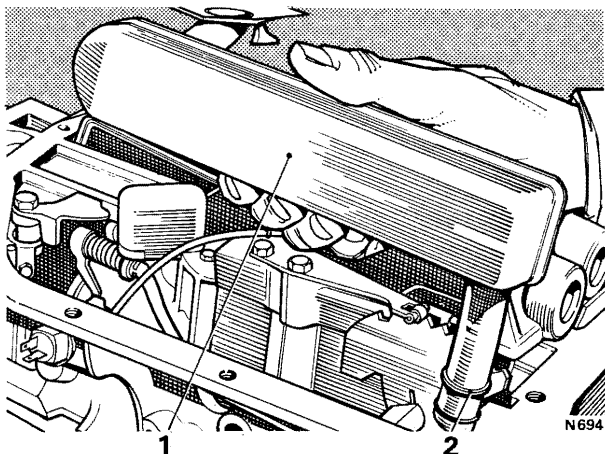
REMOVING THE STRAINER AND INTAKE PIPE ASSEMBLY (EARLY CARS)
